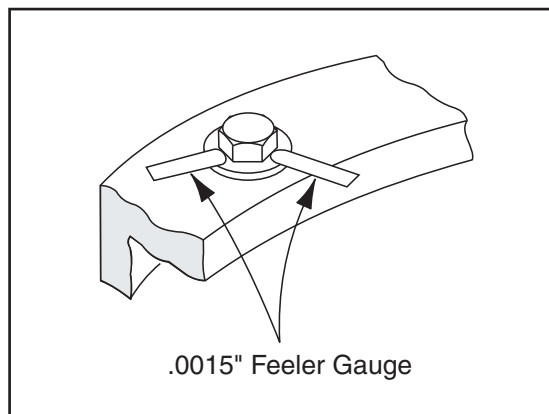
Swing Bearing Bolt Feeler Gauge Check
